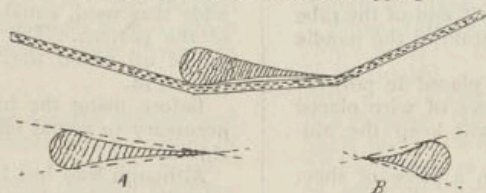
The Section of Razor Blade determines Angle of Setting.
